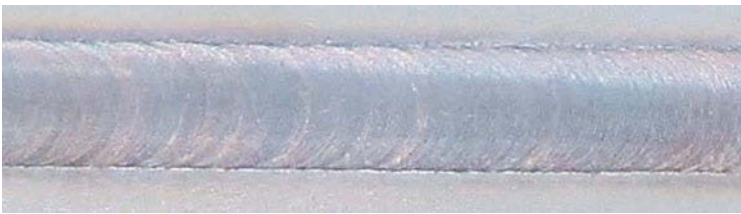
Weld appearance of a FSW created on AISI304 (5 mm length probe).
